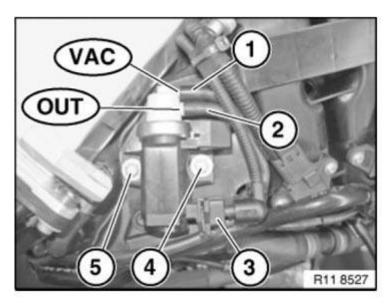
Identifying Vacuum Hoses, Plug Connection And Screws Courtesy of BMW OF NORTH AMERICA, INC.
